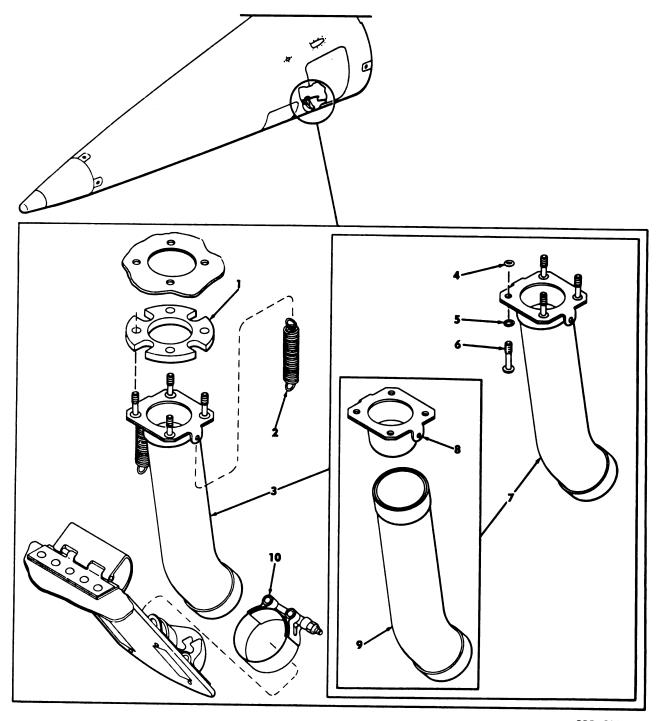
EQUIPMENT INSTALLATION, FORWARD BODY ASSEMBLY /9020575 AND 9979613/ /SEE FIGURE 33 FOR NEXT HIGHER ASSEMBLY/
